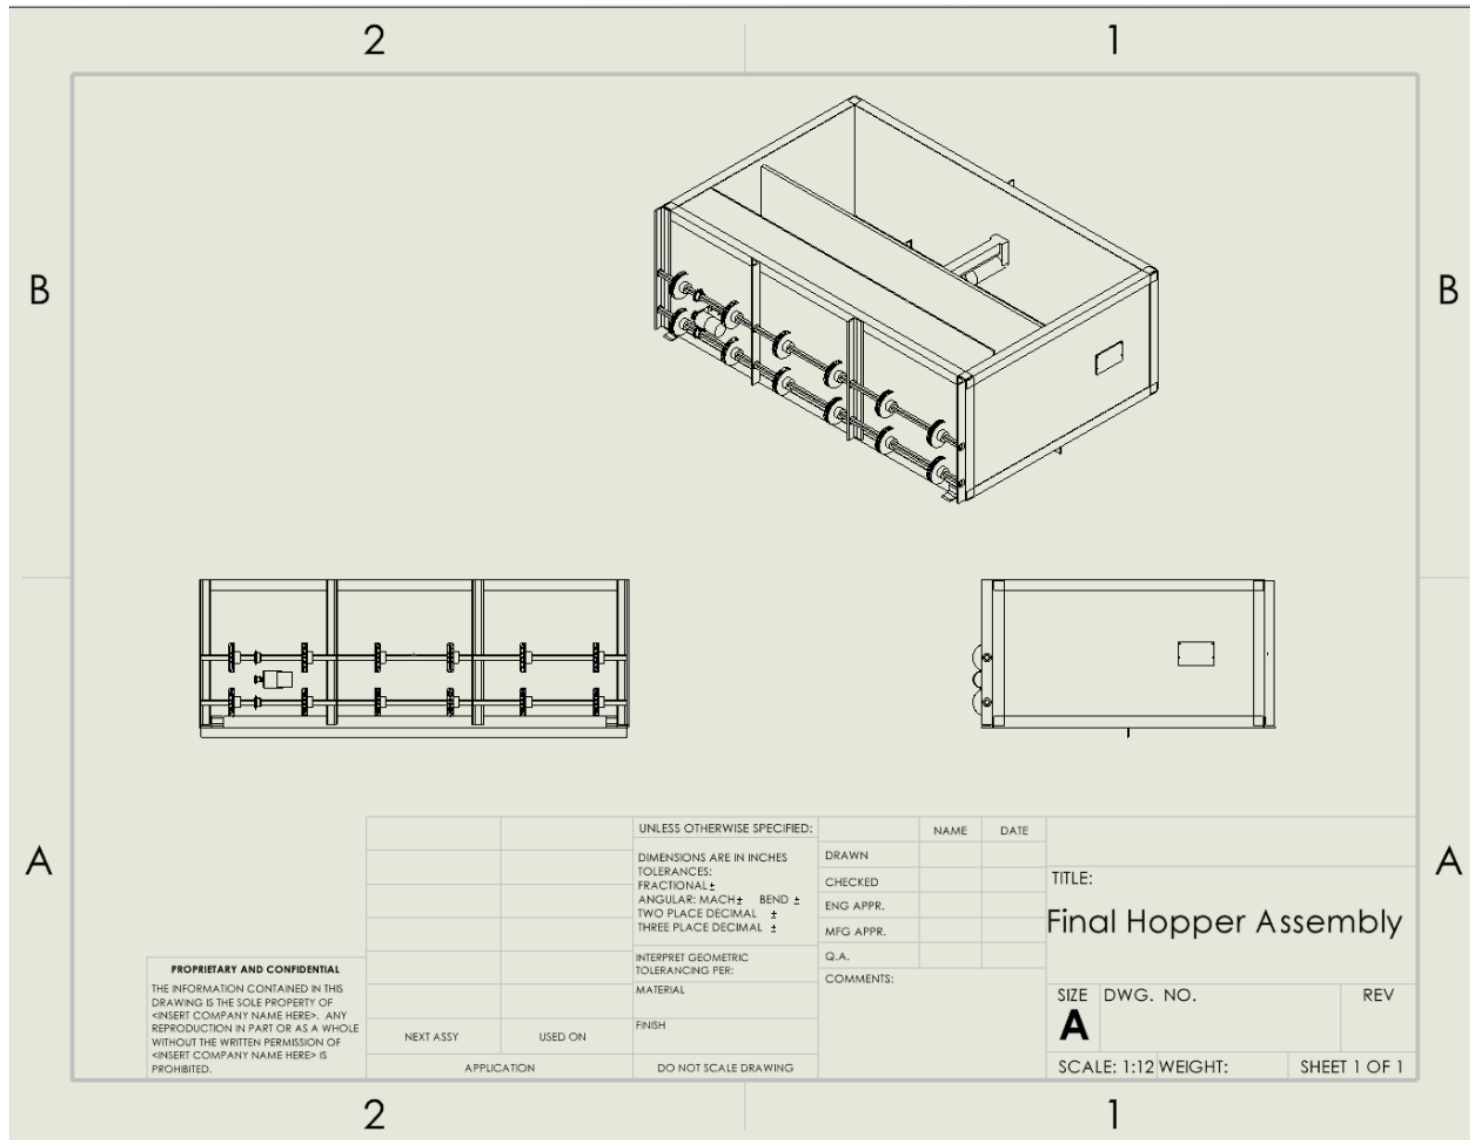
Final Hopper Assembly of Shingling Robot Module (Top Module)
